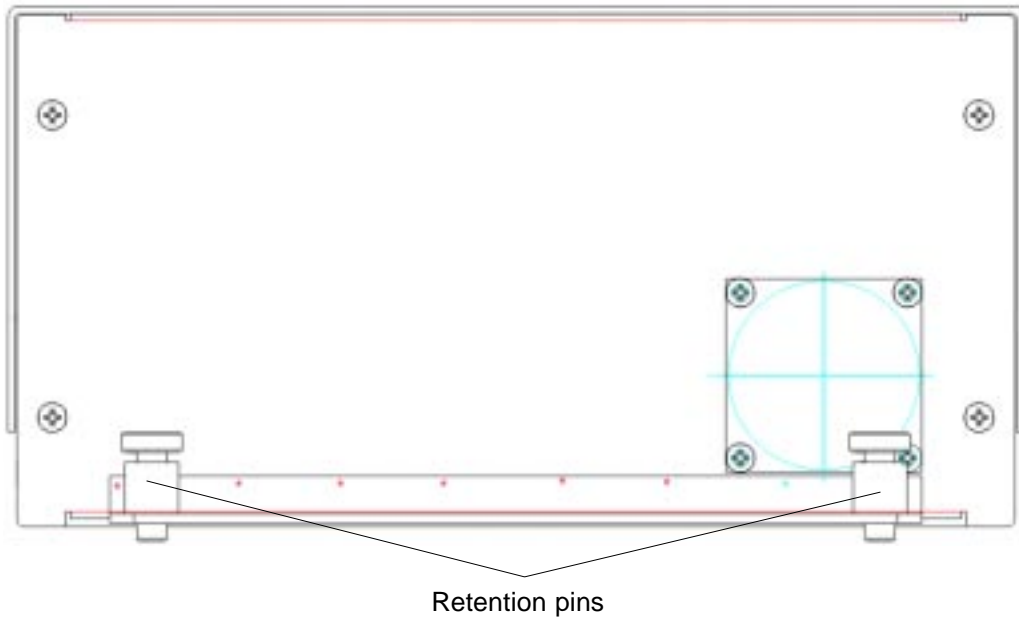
BINOS E Sheet-metal Housing , Front panel, Front view
